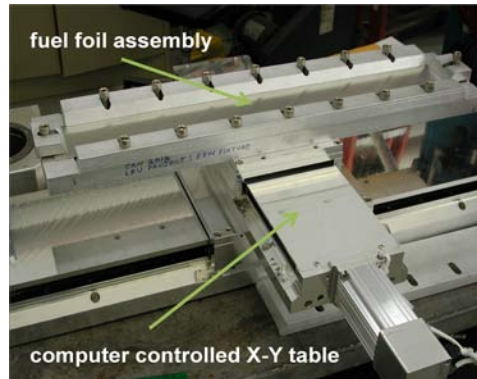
Photograph of EBW fuel foil welding fixture mounted to Aerotech X-Y linear motion table.
